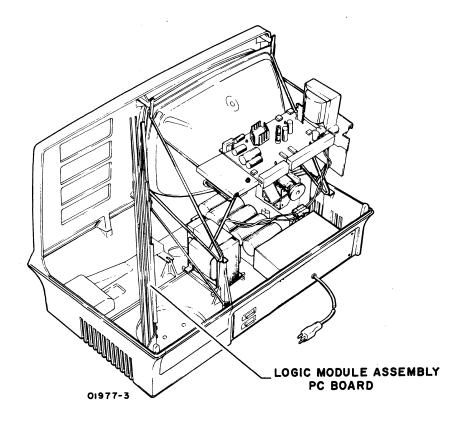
Location of Logic Module Assembly PC Board in Display Terminal
